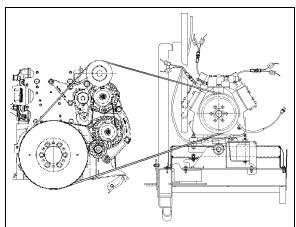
A/C COMPRESSOR BELT ADJUSTMENT22288
